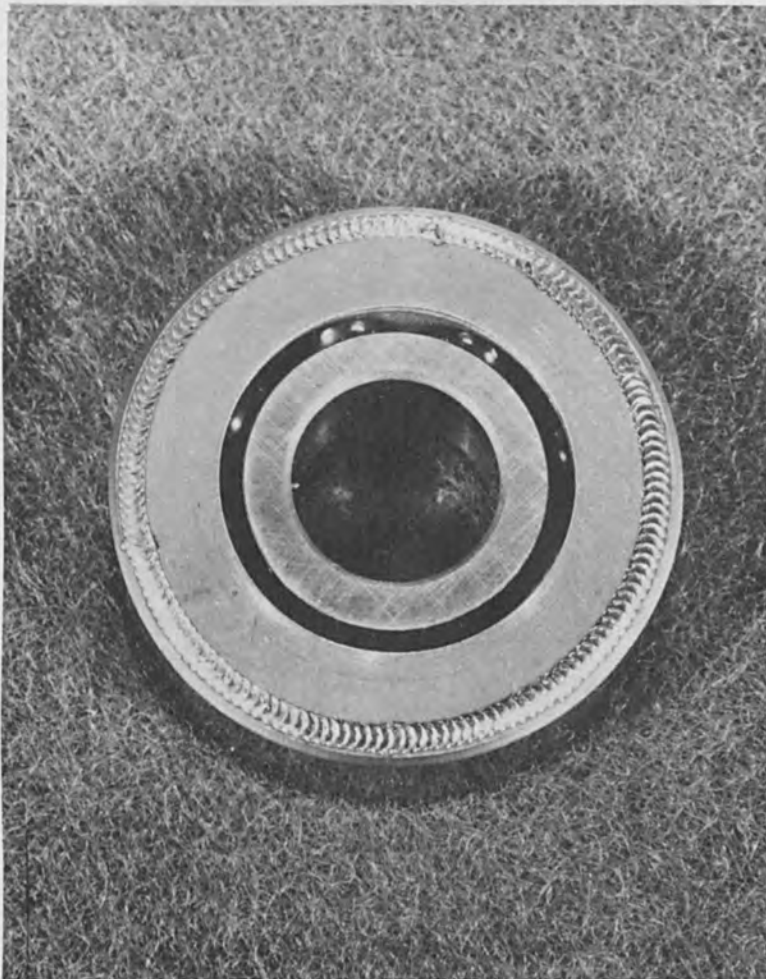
Shows a Laser welded retainer ring to a standard ball bearing. The retainer ring, made of 321 stainless steel is welded to the outer race 440 C bearing material. The weld had to be accomplished without softening the fully heat treated 440 C material in the ball race area.
